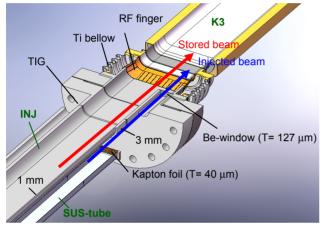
Cutaway view of the assembly of K3, INJ and the SUS-tube.
